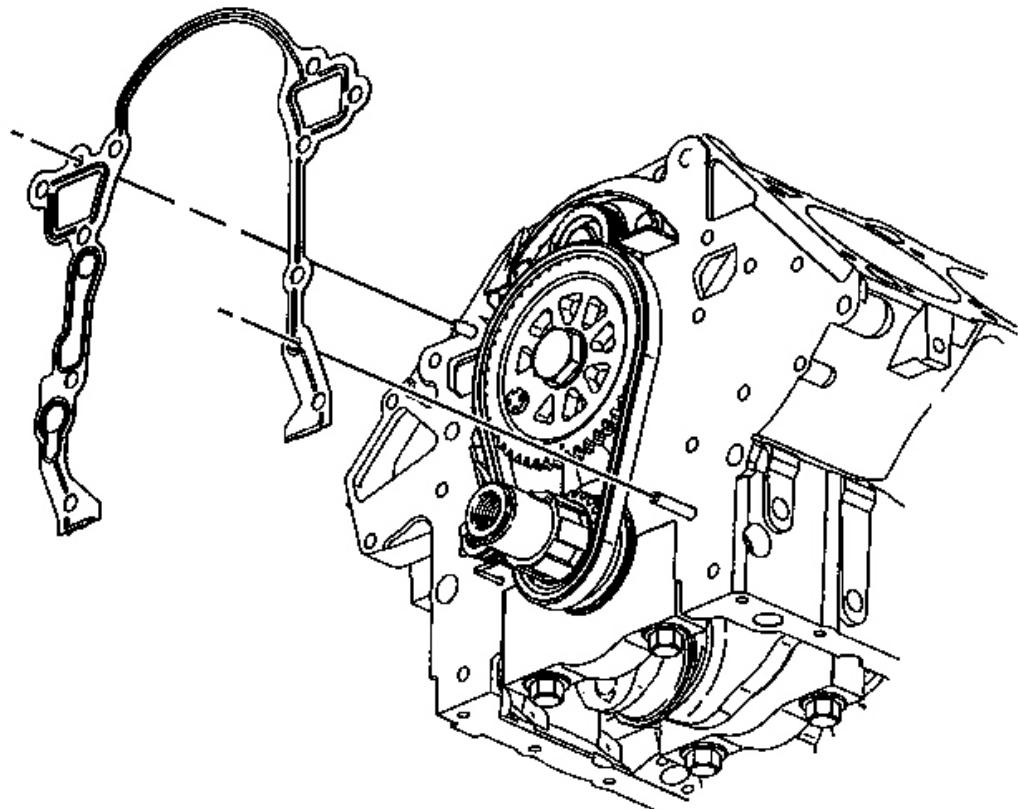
View Of Engine Front Cover & Oil Filter Adapter
